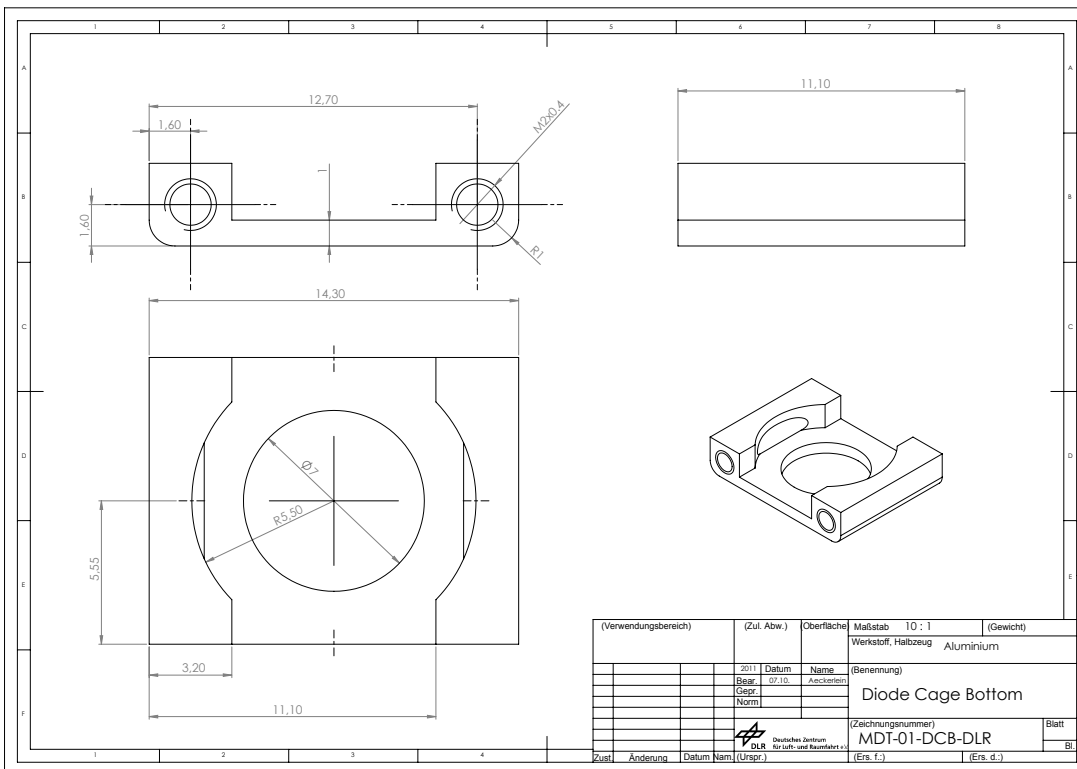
Technical drawing of the MDT-01-001 case – diode cage (Section 3.5.2).
